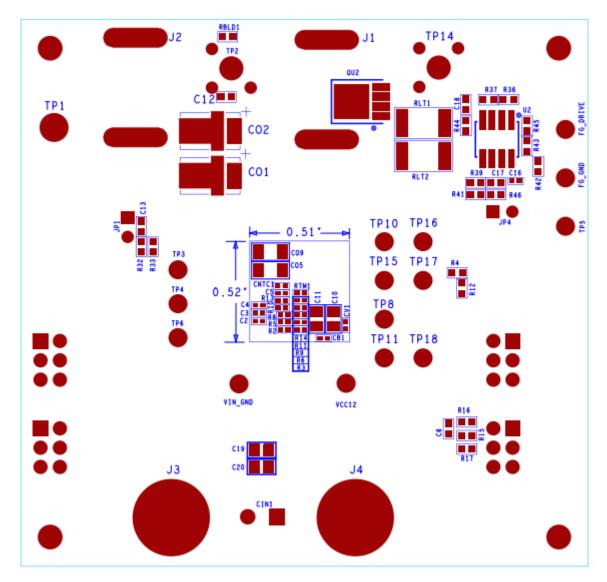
PCB - BOTTOM ASSEMBLY (TOP VIEW)
